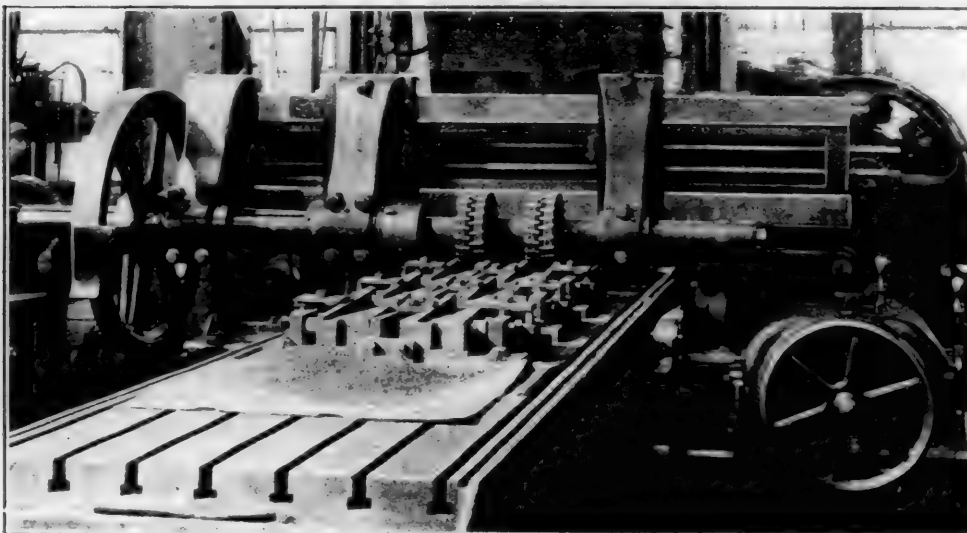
FINISHING THE INSIDE SURFACES OF SHOES AND WEDGES.
